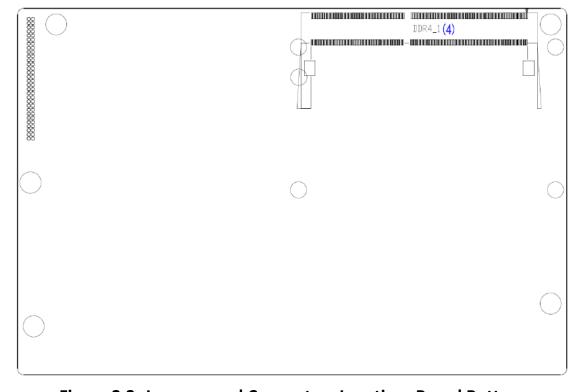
Jumpers and Connectors Location- Board Bottom
